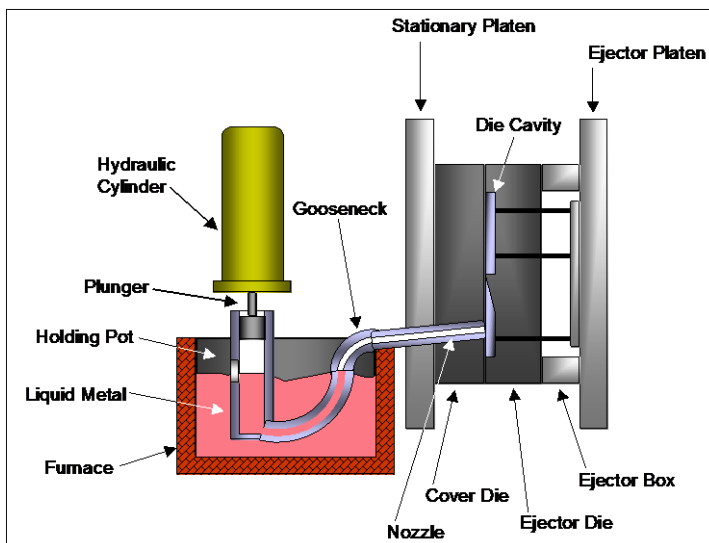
Graphical illustration of hot chamber die casting [26].
